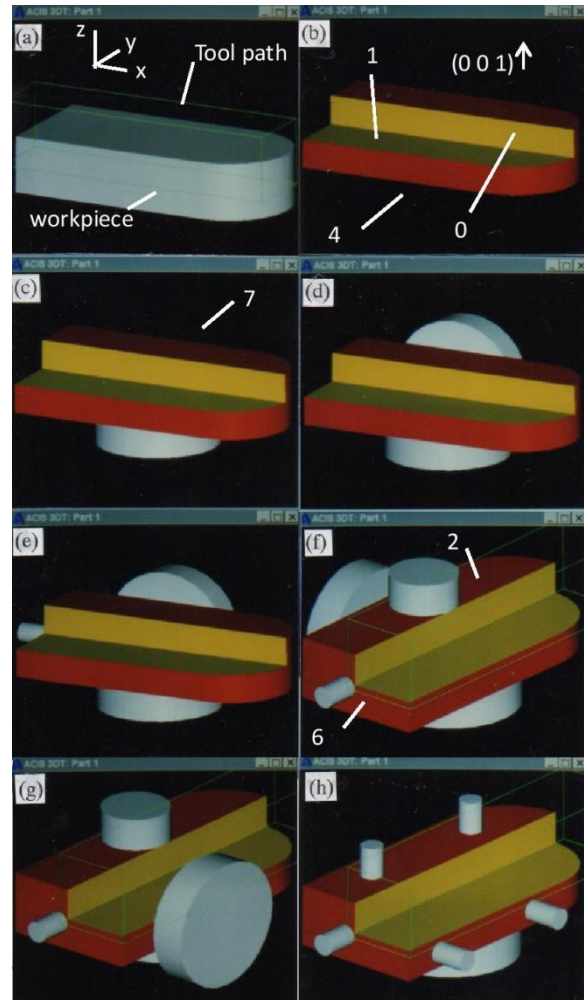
Example of fixture planning of a simple milling operation on a part of simple geometry with discrete, regular fixturing devices.
